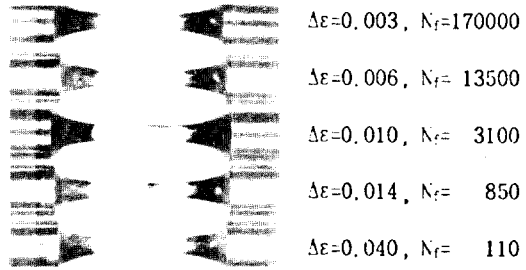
Macro appearance of smooth specimen after fatigue test (welded by M-16)
